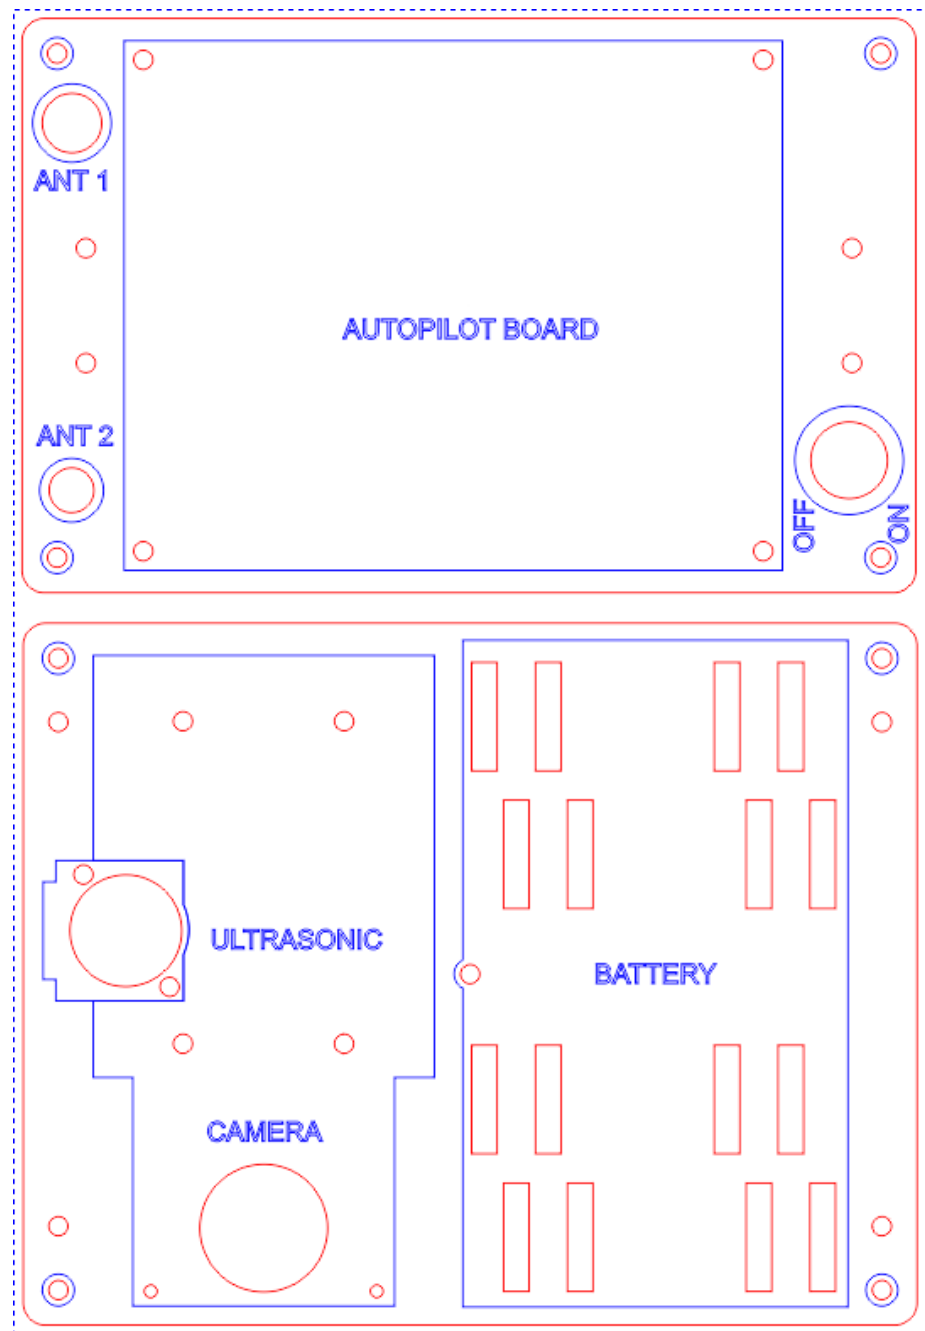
Acrylic Cutter Initial Design in CorelDRAW v14.0
